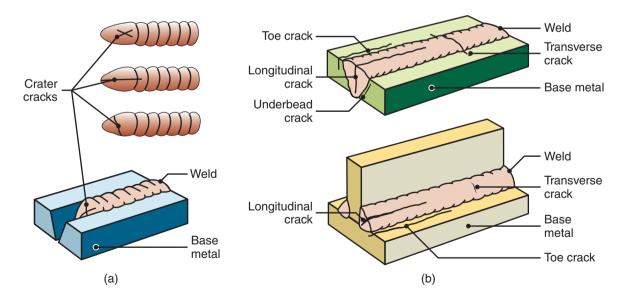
Types of cracks developed in welded joints. The cracks are caused by thermal stresses, similar to the development of hot tears in castings, as shown in Fig. 10.14.
